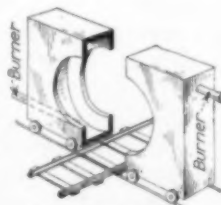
Girth-Seam Annealing Furnace in Open Position
